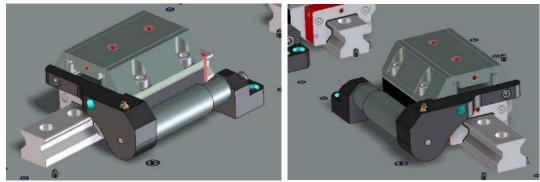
Carriage bracket 1, 29L034 (left) and carriage bracket 2, 29L039 (right)
